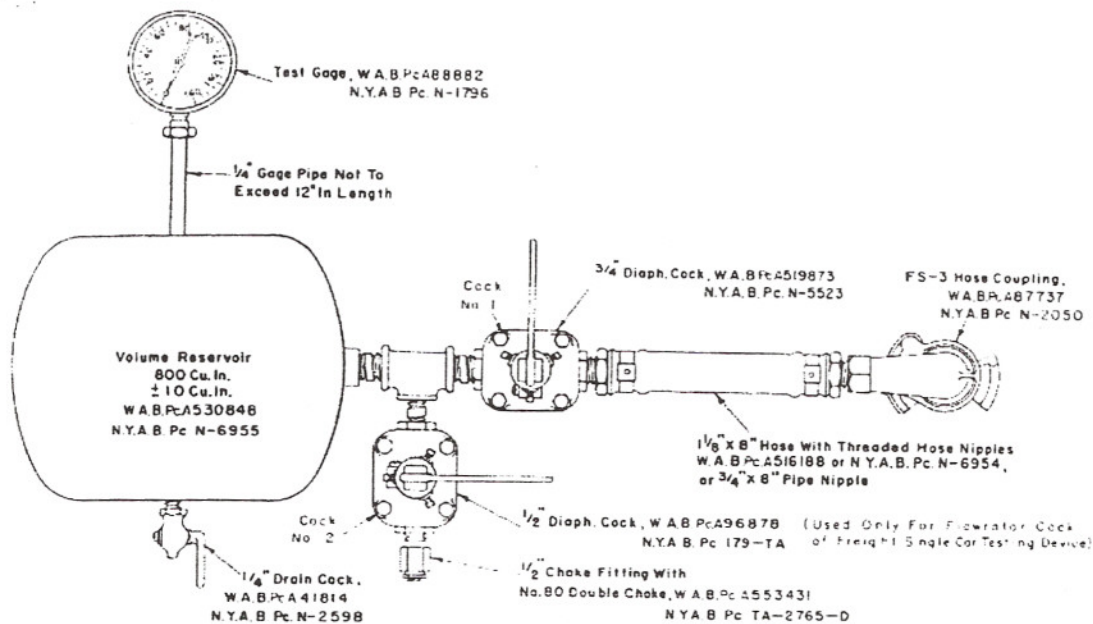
Test Rack, Single Car Testing Device (Alternate Method)
